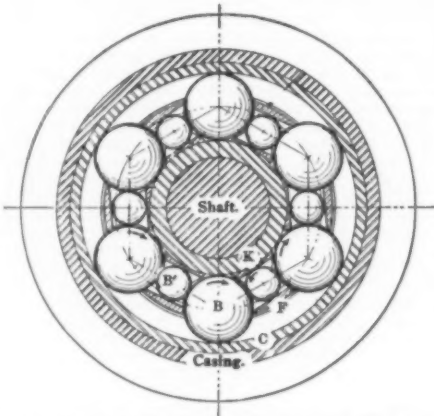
SECTION SHOWING DETAILS OF CHAPMAN DOUBLE BALL BEARING.
